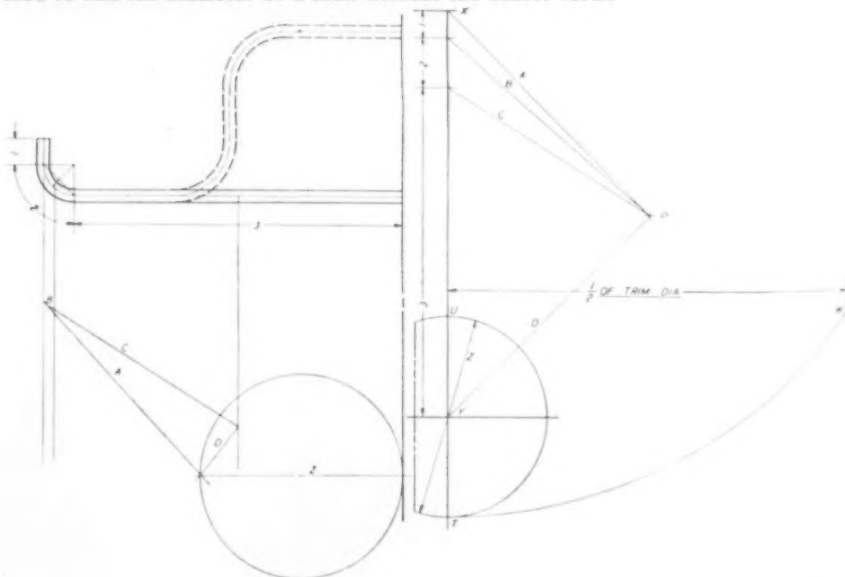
After the trim diameter is known add the trimming stock as shown and using this diameter, ignore the flange on the original part. Then proceed to compute the blank diameter.
